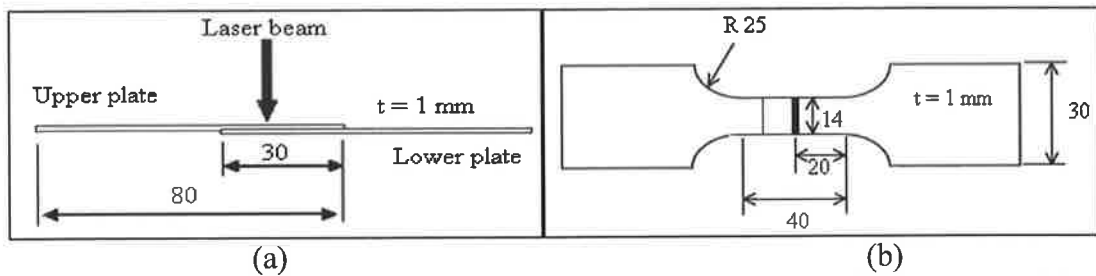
Schematic diagrams showing the (a) Centre-line welding lap joint, (b) Tensile-shear specimen [170].
